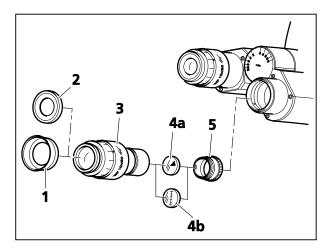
Inserting the eyepiece pointer or eyepiece micrometer
